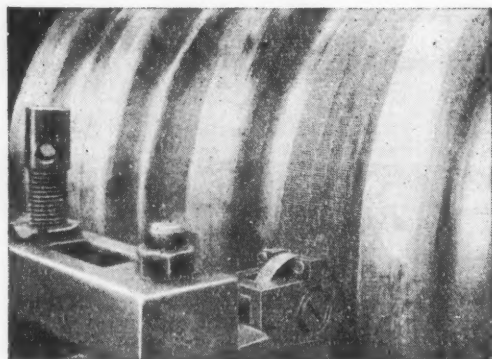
Ragging of blooming mill rolls on the roll lathe.
